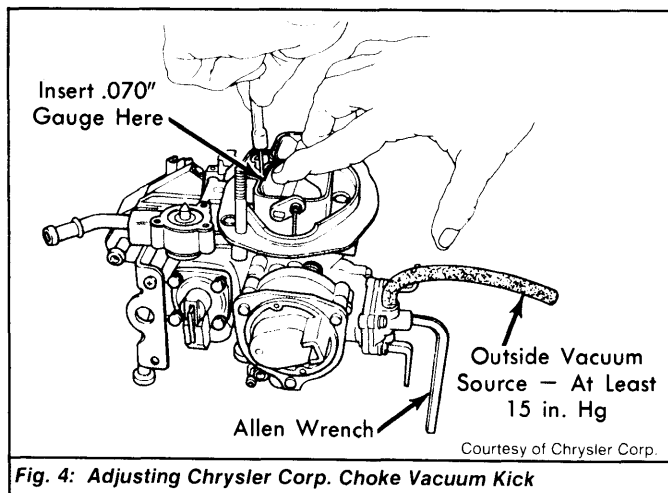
Adjusting Chrysler Corp. Choke Vacuum Kick
